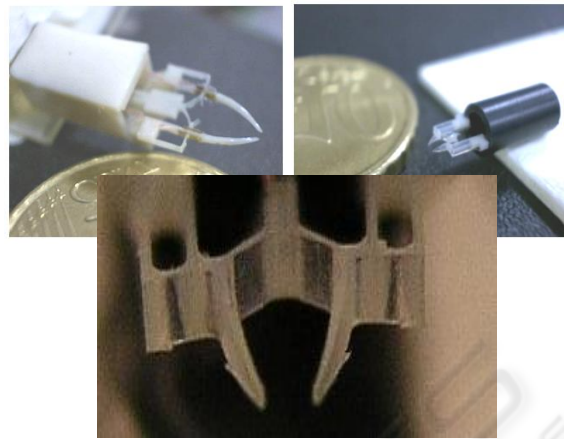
First gripper prototype (top left) and miniaturized version (top right, bottom).
